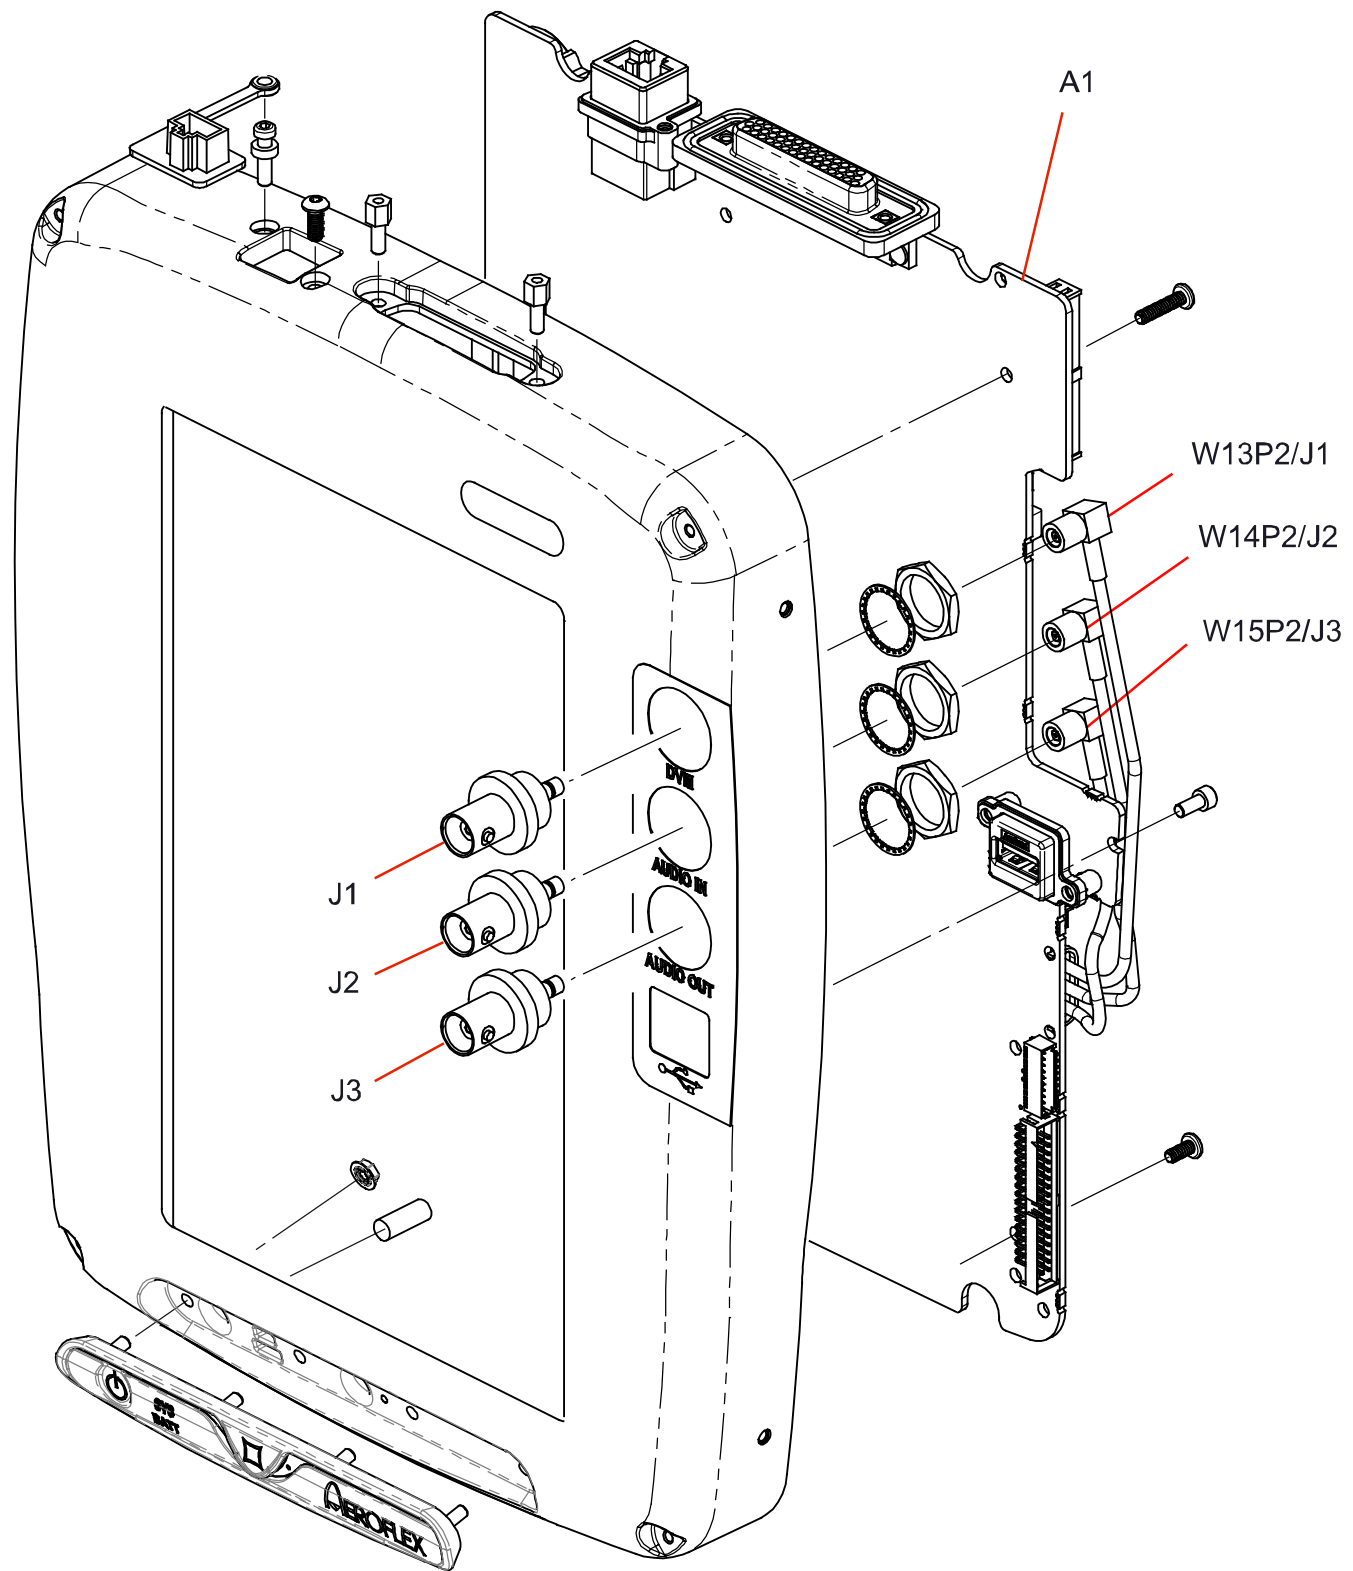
Power Supply PCB Assy (Sheet 2 of 2)
